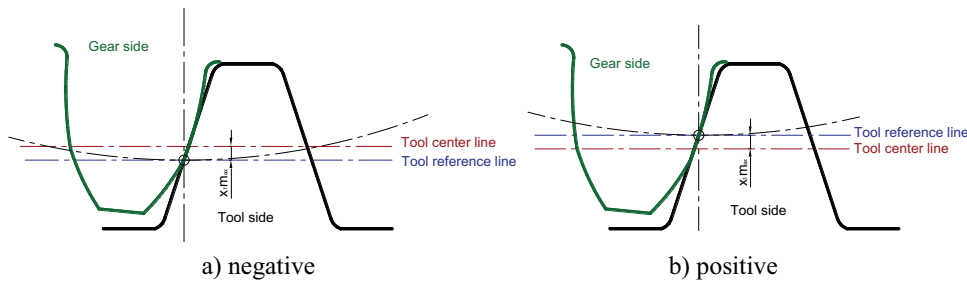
The connection possibilities of the tool basic rack gear tooth profile and the gear profile
